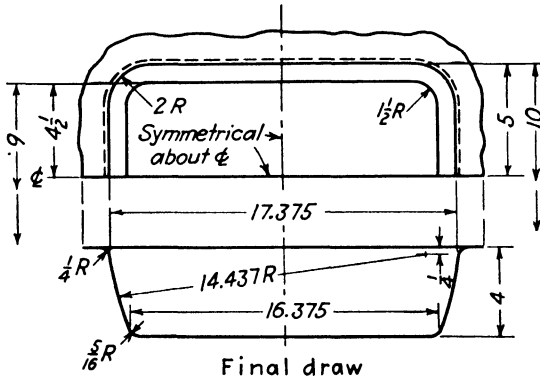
Final drawing and stretching of the first drawn container completing the work ready for trimming.
